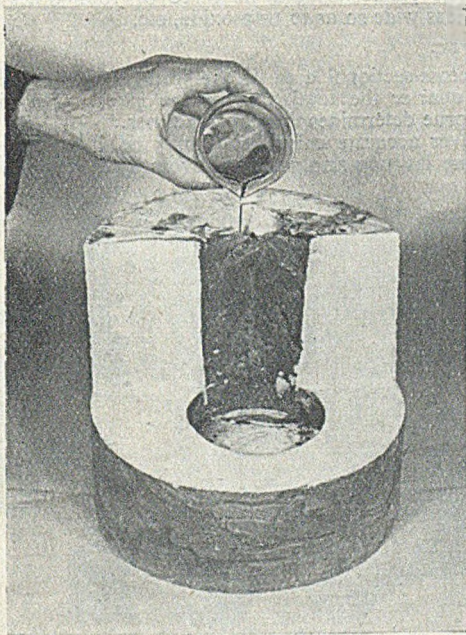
ARRANGEMENT FOR POURING RING RUNNER MOULDS.
